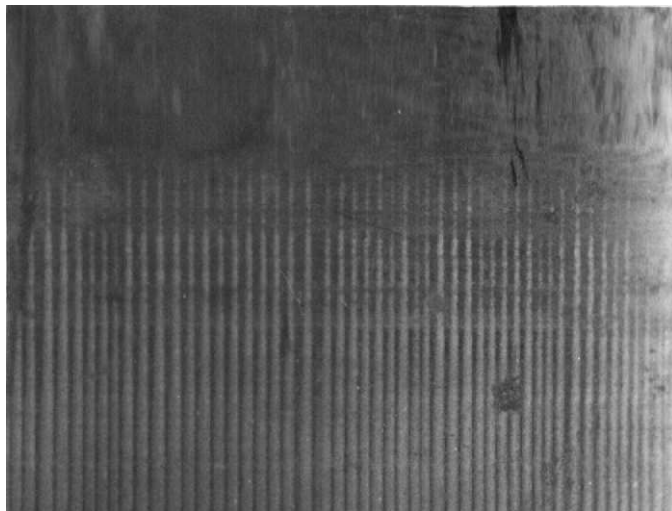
Corrugation pattern on the inner race of NU 326 motor bearing after about 6000 h of operation
